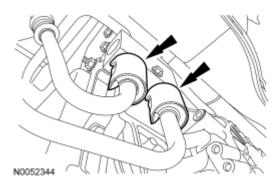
Locating Secondary Latches On Transmission Fluid Cooler Tubes Courtesy of FORD MOTOR CO.
